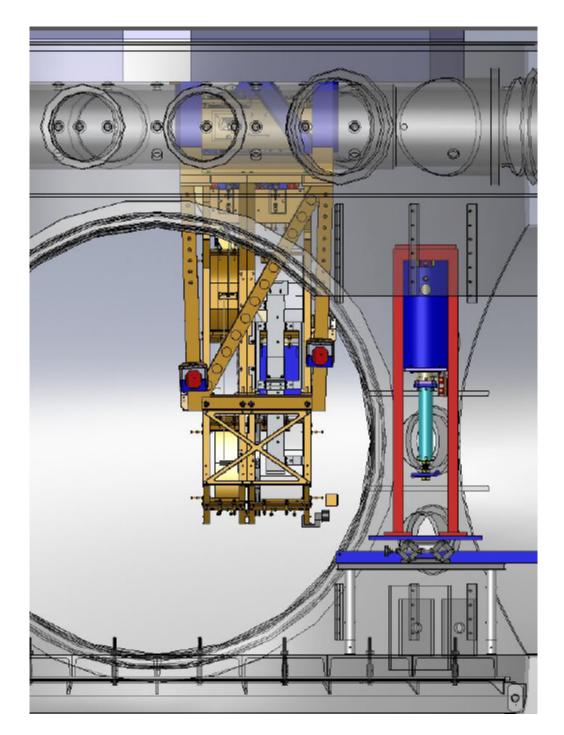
Lift Fixture for Lifting Suspension Assy to the ISI Stage 0 Prior to Clamping
